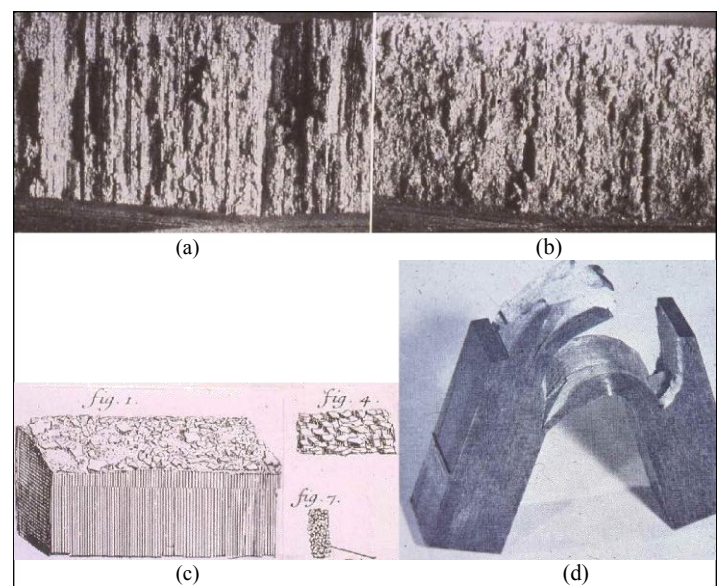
Wrought iron fracture surfaces: (a and b) fractographs by optical microscopy (5X; the first is parallel and the second is normal to the slag stringers; Metals Handbook, 1987); (c) sketches drawn by Réaumur in 1722, after C.S. Smith (1960); and (d) macroscopic splitting along the slag stringers in a Charpy specimen (Metals Handbook, 1987).
